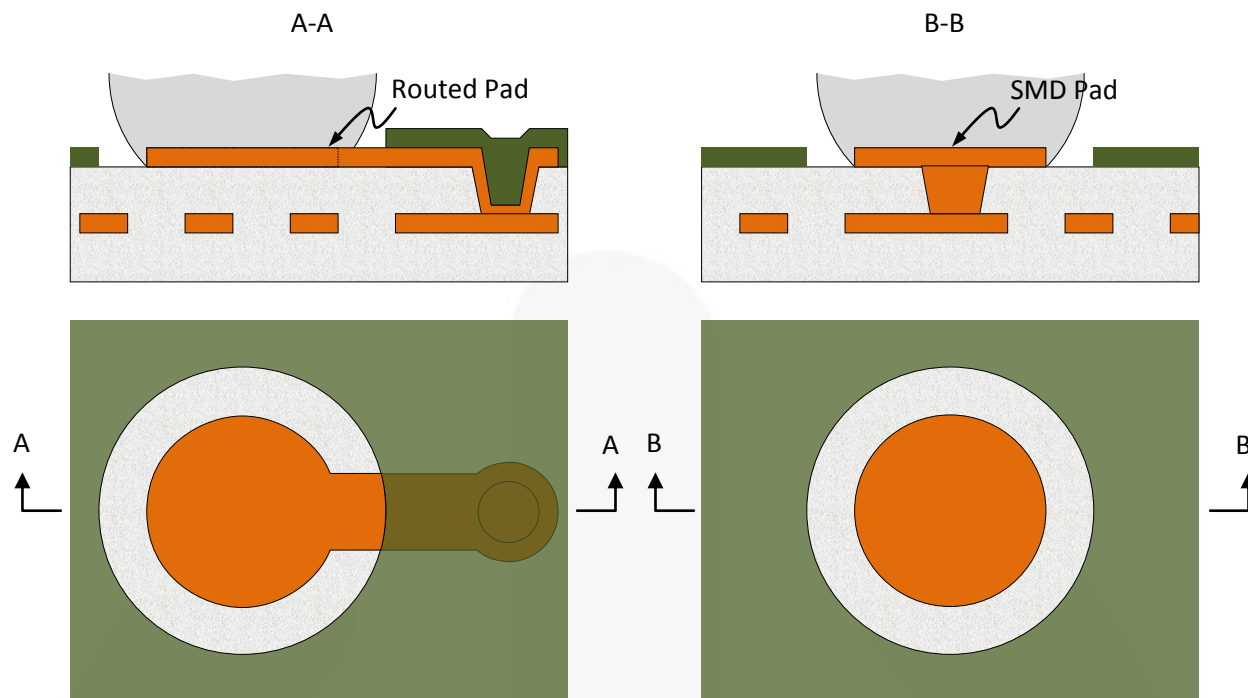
Cross-Sectional View and Top View of Routed PCB Copper Pad and via in Pad PCB Copper Pad. Filled Copper via is desired in the Via in Pad Design
